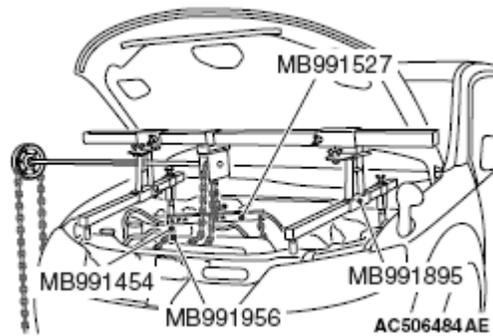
Identifying Special Tool Engine Hanger (MB991454 Or MB991995)
